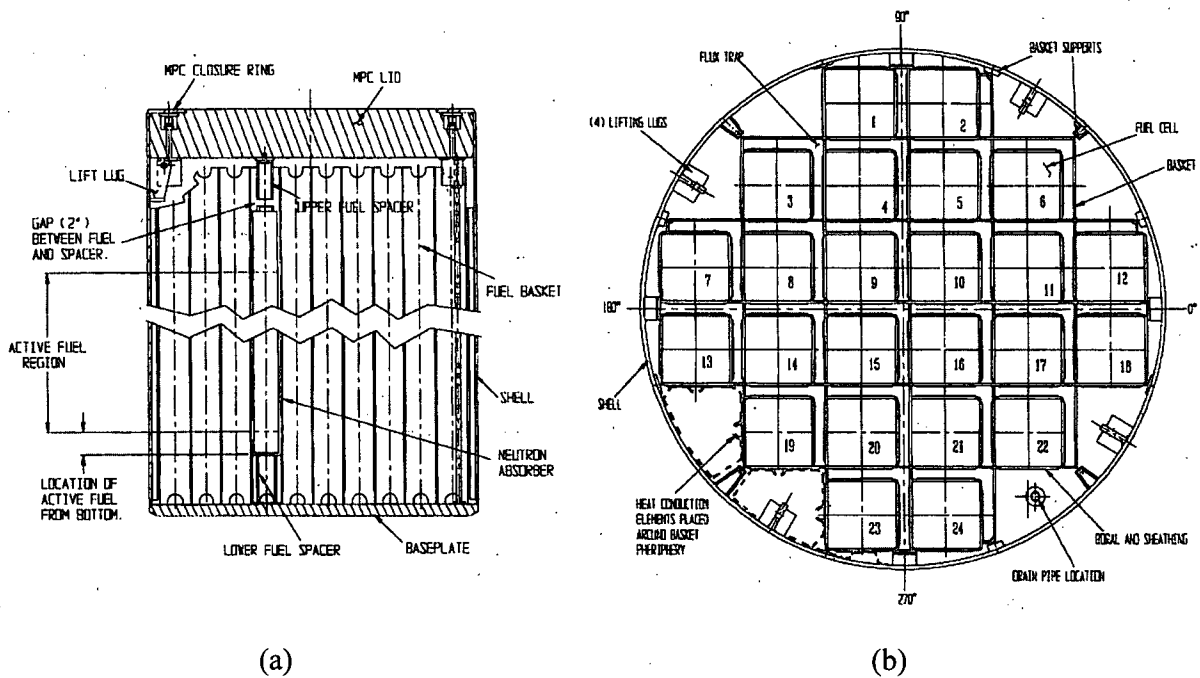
Rail-Steel cask MPC: (a) cross-sectional view through the axis of the cask, (b) cross-sectional through the midplane of the overpack (Holtec 2004).
